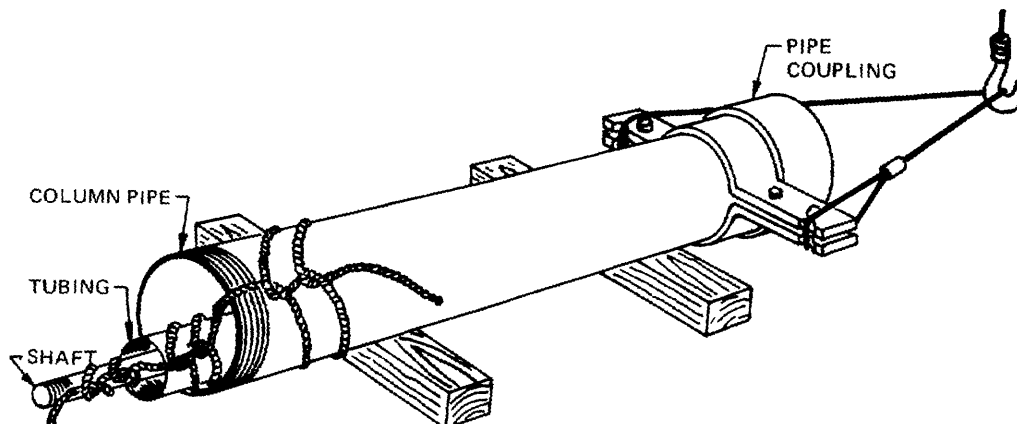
COLUMN SECTION RIGGED FOR LIFTING.
